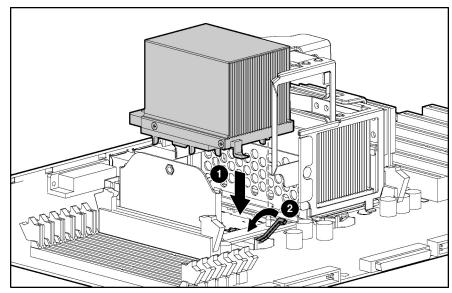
Installing the processor/heatsink assembly and securing the processor locking lever
